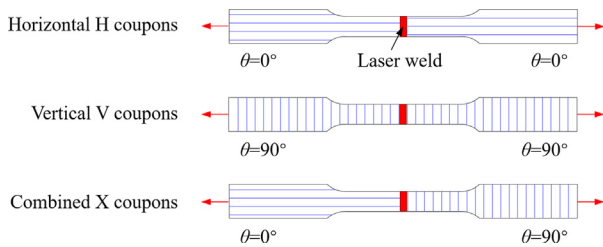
Welded tensile coupon families, showing the print layer direction of the half parts.
